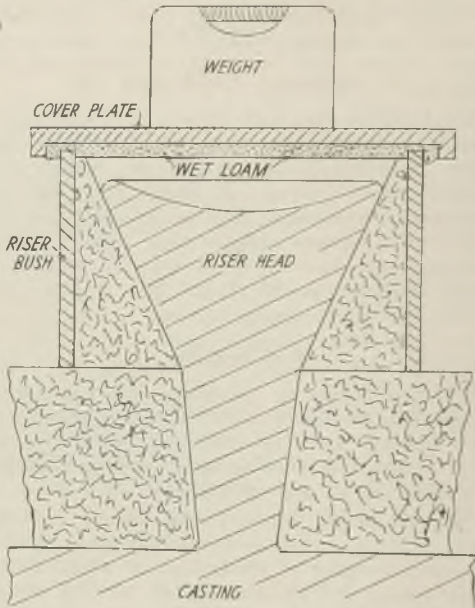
SECTION OF ASSEMBLY FOR STEAM-PRESSURE FEEDING OF A CASTING.
